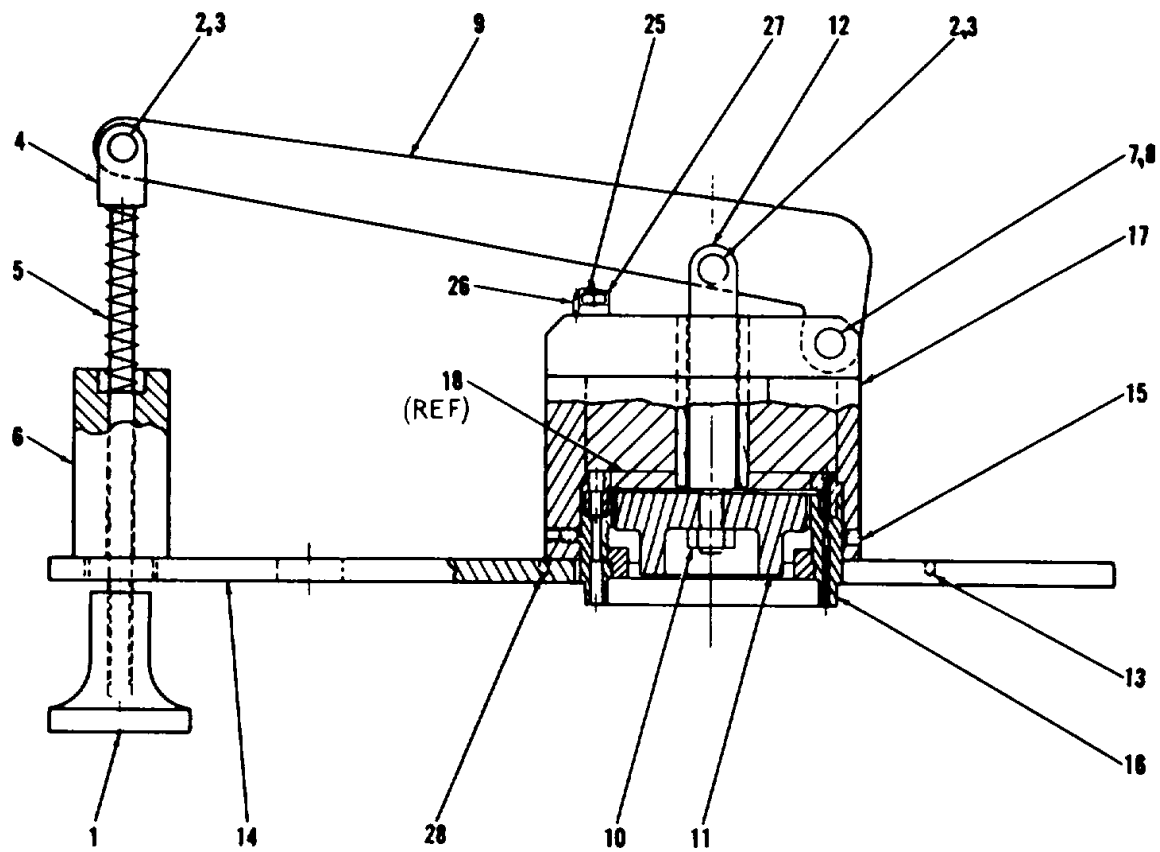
<sup>(1)</sup> Holding and Ejecting Fixture (sheet 1 of 2).
